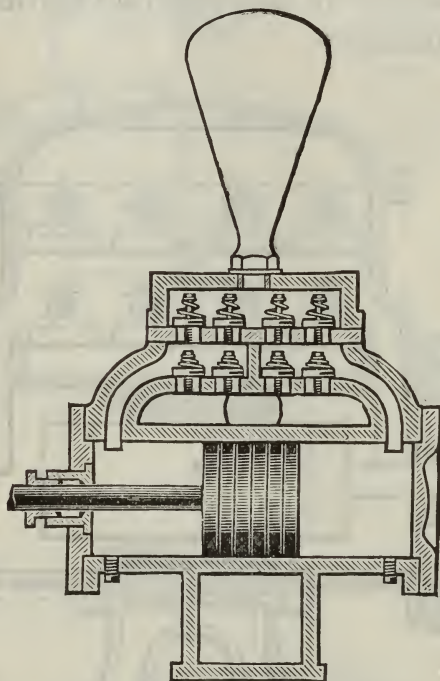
,282.—Double acting piston water end, showing sectional view of piston, cylinder, stuffing box, valves, and water passages. The lower row of valve are the inlet valves, and the upper row the discharge valves.
